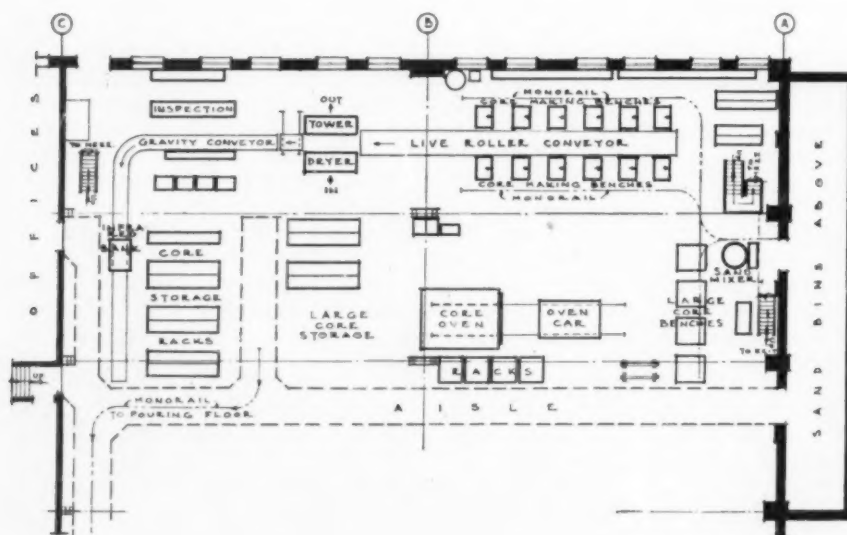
NEW LAYOUT OF CORE-MAKING ROOM SHOWING HANDLING SYSTEM
